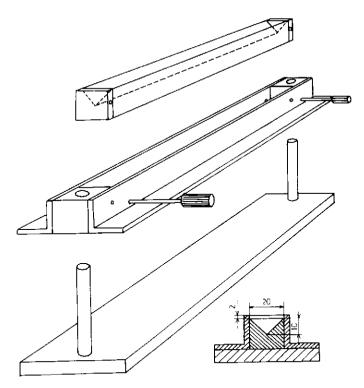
The mount and mounting for the burning test proposed by the U.K. [3].
